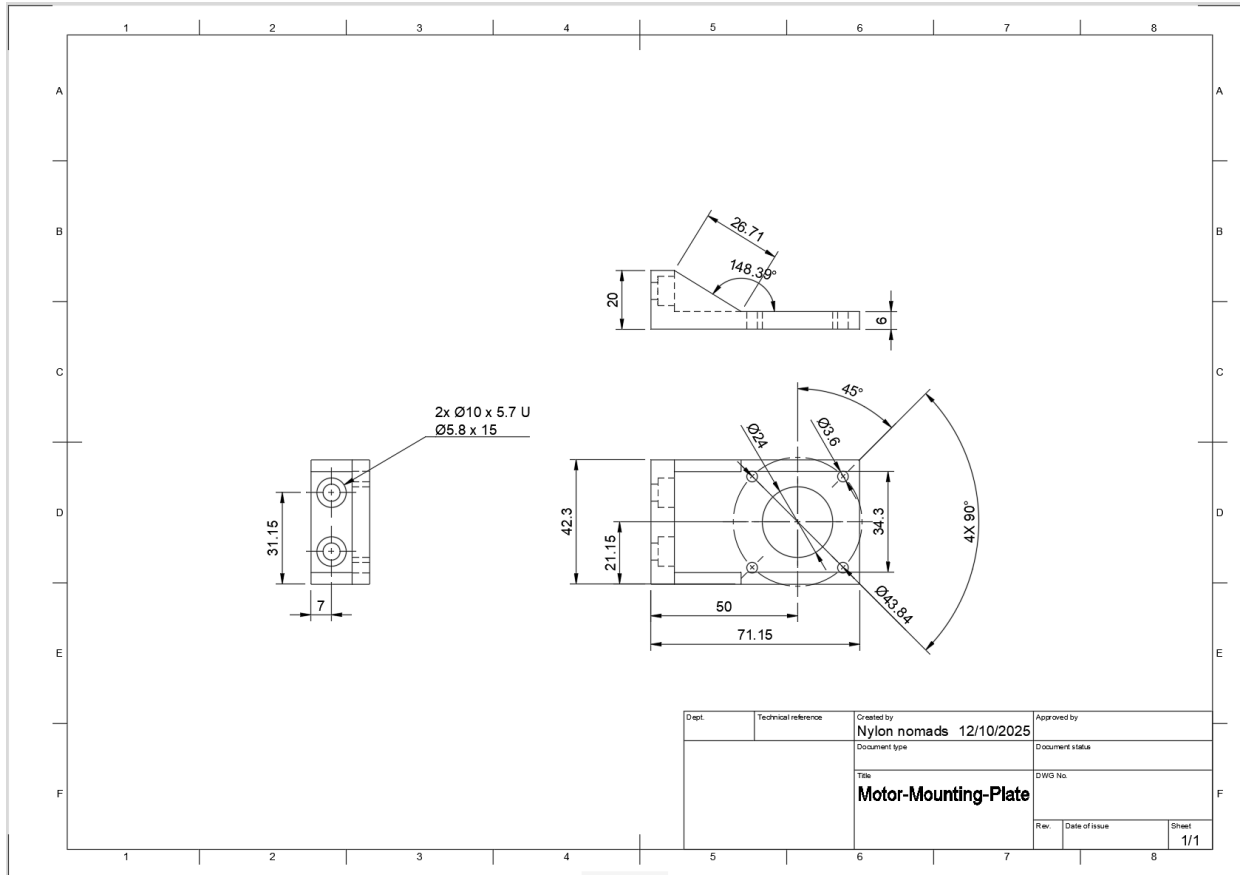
Drawing of Design of Motor Mounting Plate in Fusion
